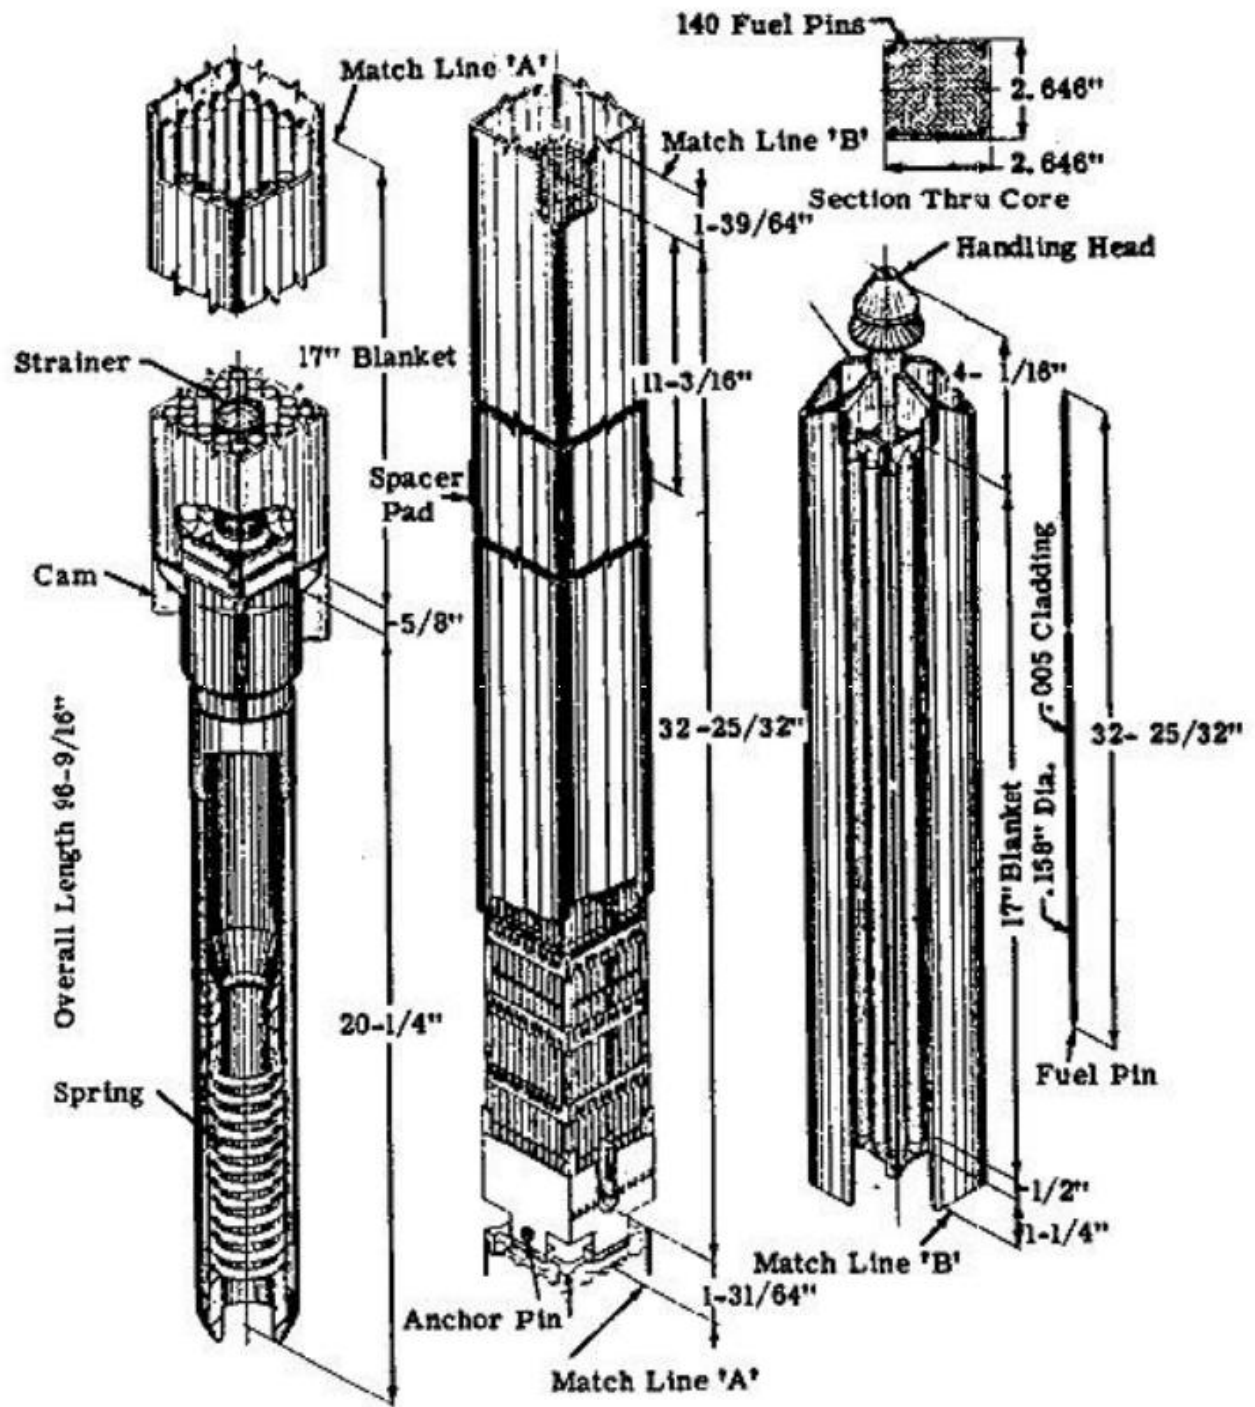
Isometric view of Fermi 1 fuel assembly [64].
